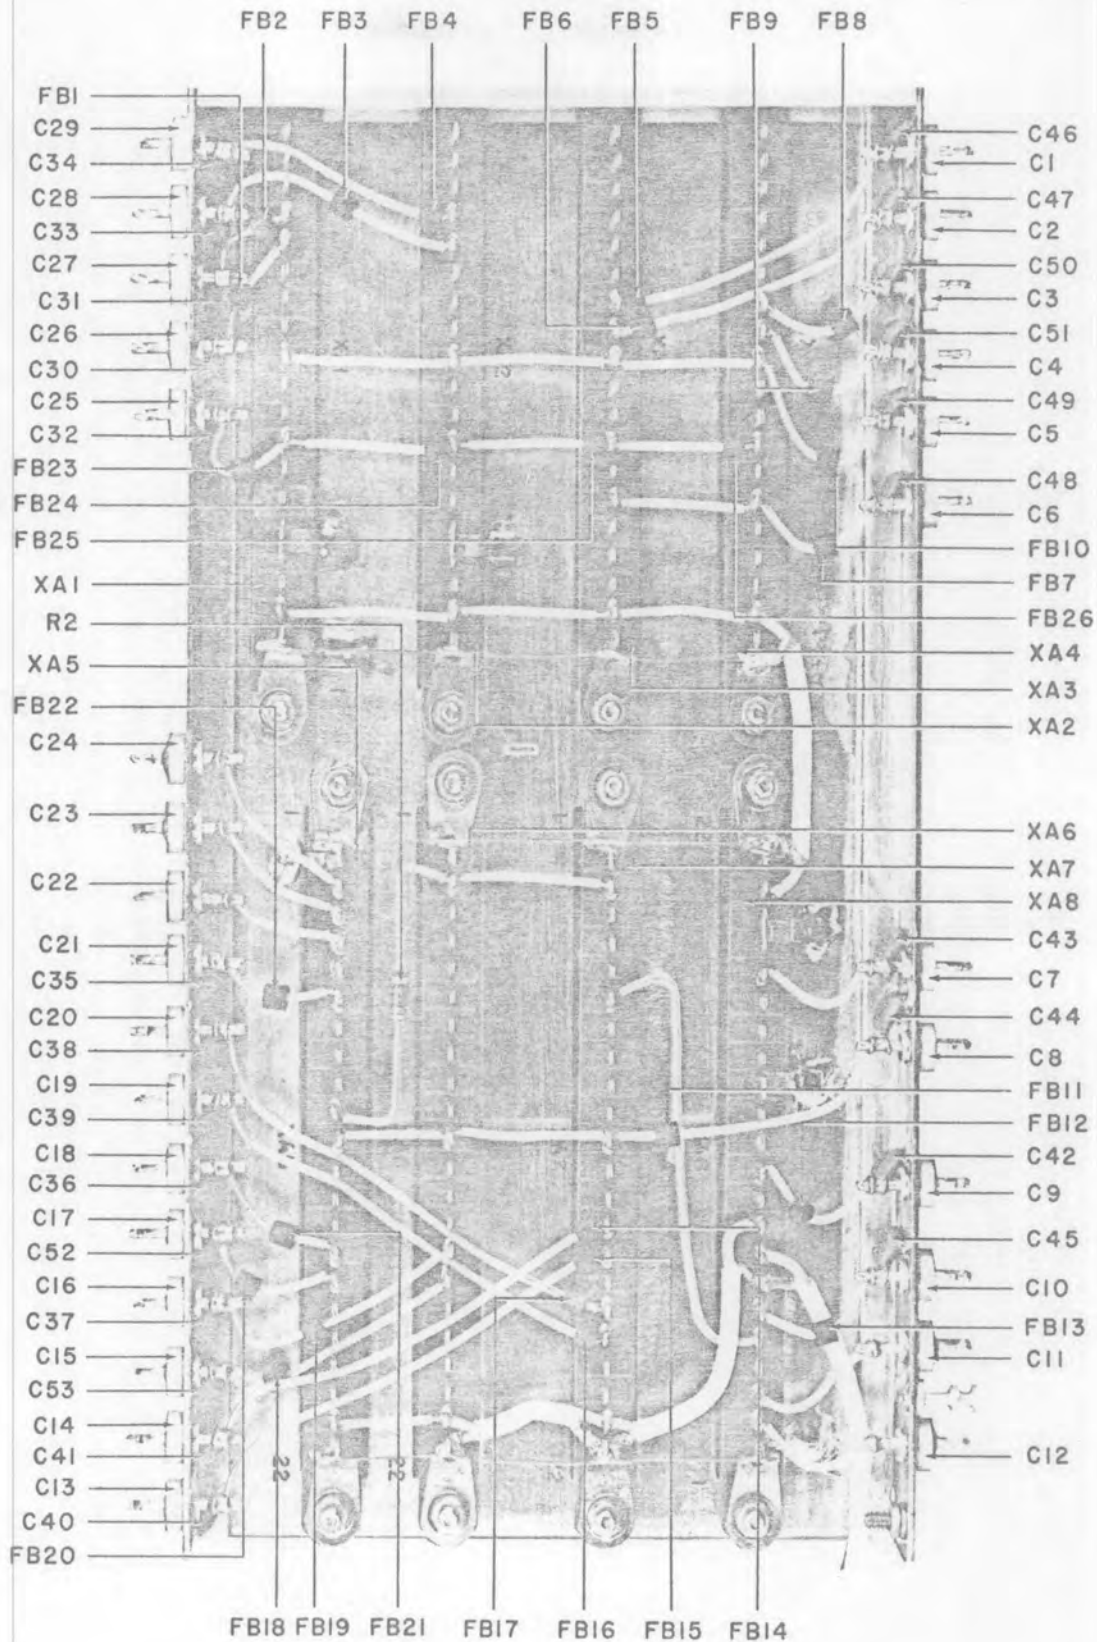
Type 72418 IF Amplifier Assembly (A4), Location of Components.
